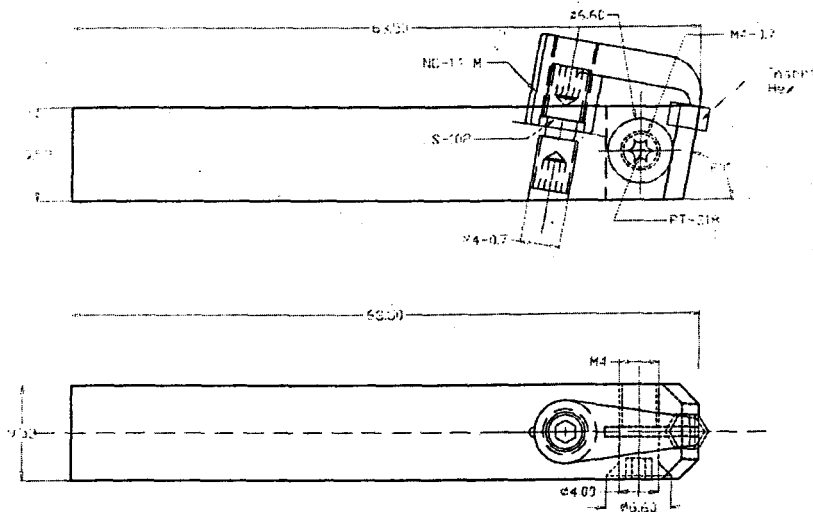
The drawing of diamond cutting tool with hexagonal cutter and steel holder
